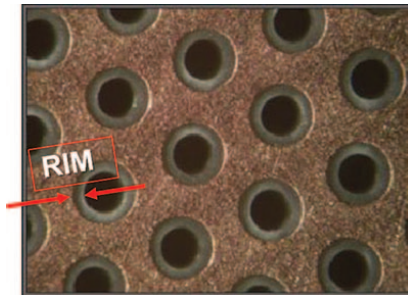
Image of a classical THGEM with the array of holes produced by drilling on a standard PCB.
